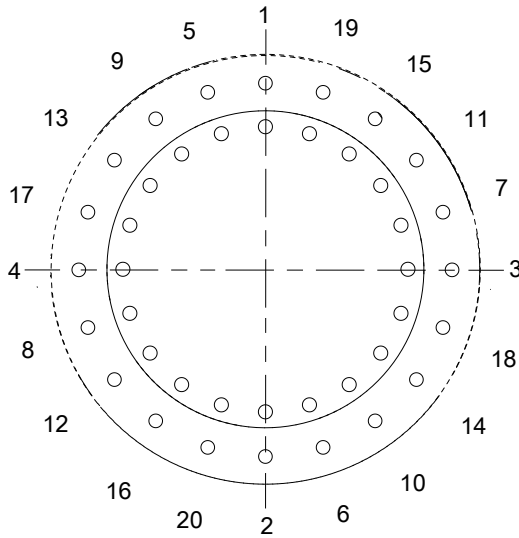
Tightening Sequence of Slewing Bearing Bolts
